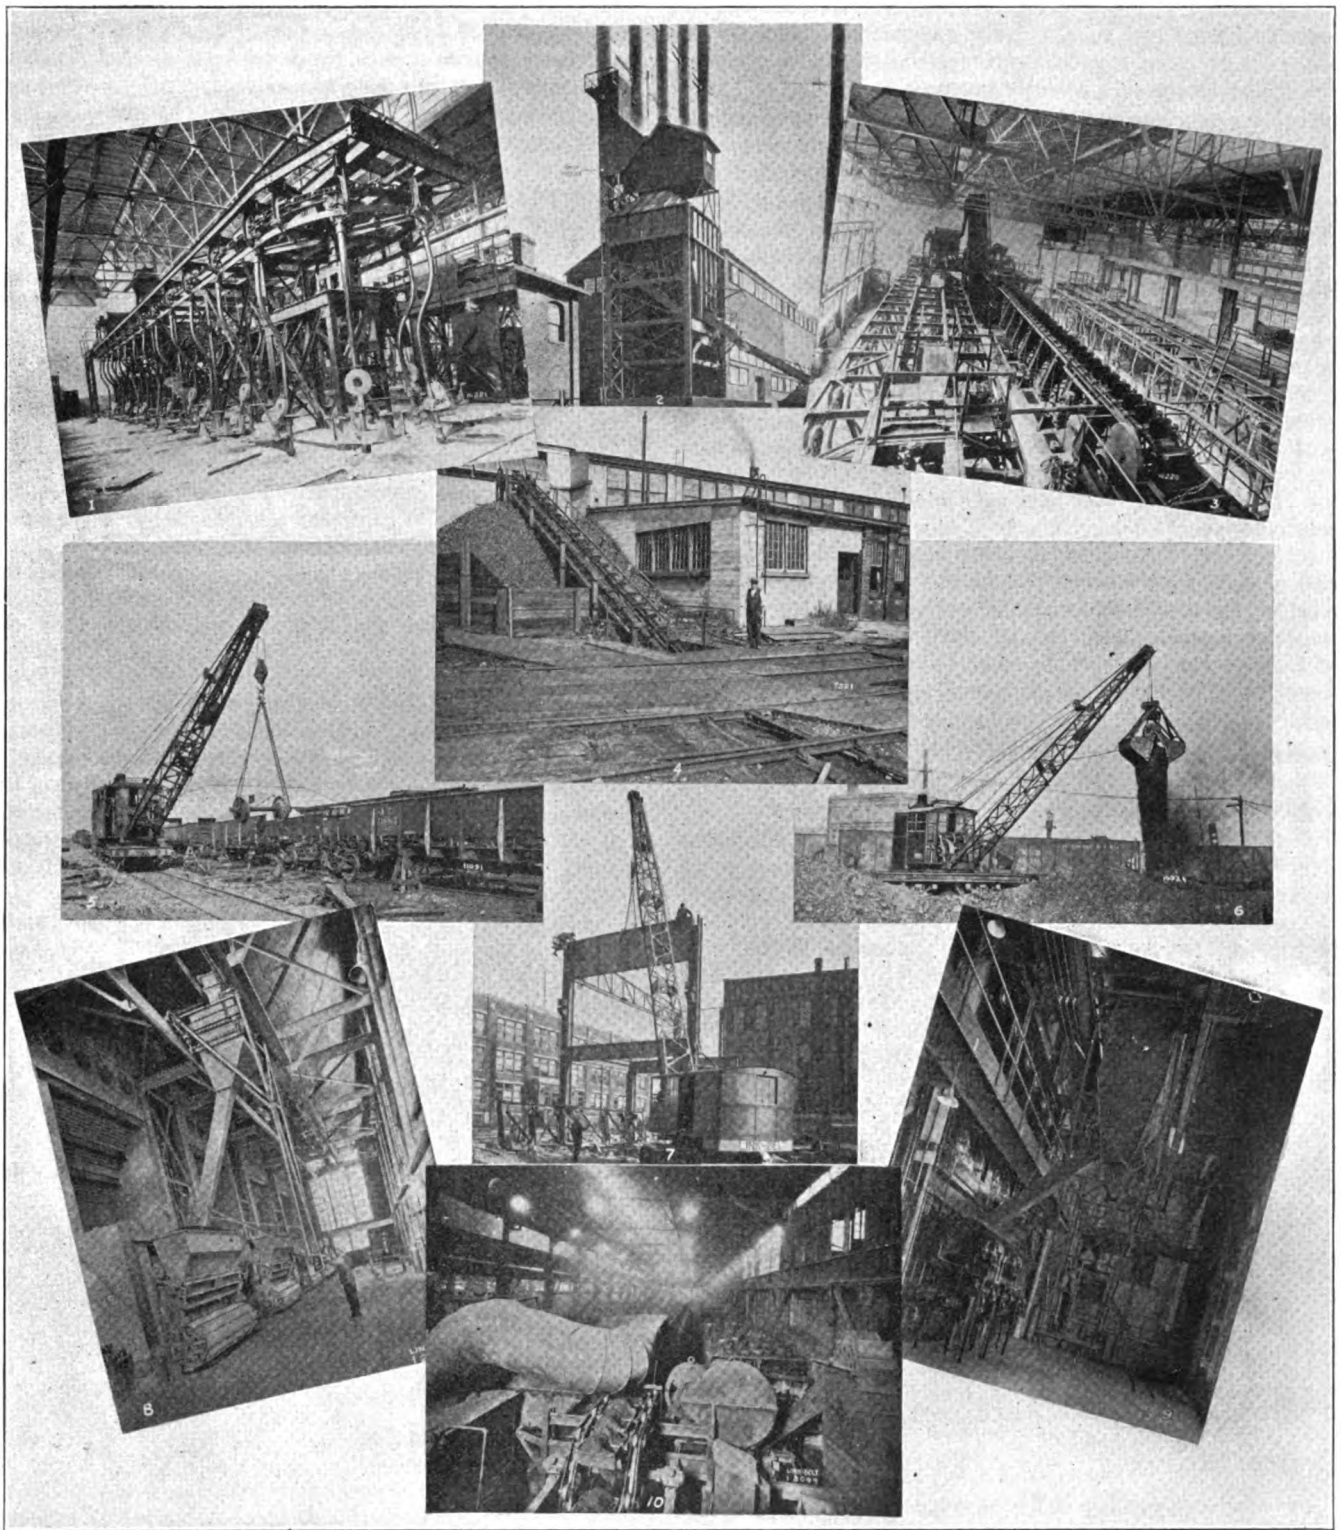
Detail view of the endless mold conveyor shown in Fig. 3. FIG. 2—Illustrates the skip hoist in operation at one of the Crucible Steel Company's plants near Pittsburgh, Pa. The skip hoist method of handling ashes, mill refuse, coal, and so forth, has become a standard practice with steel plants. Under many conditions it affords the most economical method for temporary storage or disposal of bulk materials. FIG. 3—Showing the complete foundry equipment of Kelsey Wheel Co. This installation, according to W. J. Kalty, saves 90 per cent of the floor space and 50 per cent of the men necessary as labor. In other words it does twice as much work as was formerly accomplished in 1/10 the floor space. FIG. 4—Illustrating the flight conveyor used to store coal at the foundry of the American Car and Foundry Co., Wilmington, Del. 5-in. x 15-in. flights—every 2 ft.—100 f.p.m. Capacity 25 tons per hour. FIG. 5—Link Belt Locomotive Crane aiding production at General American Tank Car Corp., East Chicago, Ind. FIG. 6—Locomotive crane saving the labor of 30 men in coal handling at a large coke and gas producing company. FIG. 7—Illustrating one of the many uses to which a gasoline, crawler type crane can be put. FIG. 8—View of boiler house showing man operating weigh larry at Cornell University. January, 1924. FIG. 9—This is a close up view of the five-ton weigh larry. Penn Central Power Co., Philadelphia, Pa. January, 1924. FIG. 10—550 ft. Peck Carrier handling facing sand at Commonwealth Steel Company, Granite City, Illinois.. This conveyor saves the labor of 100 men over the old system it replaced.
